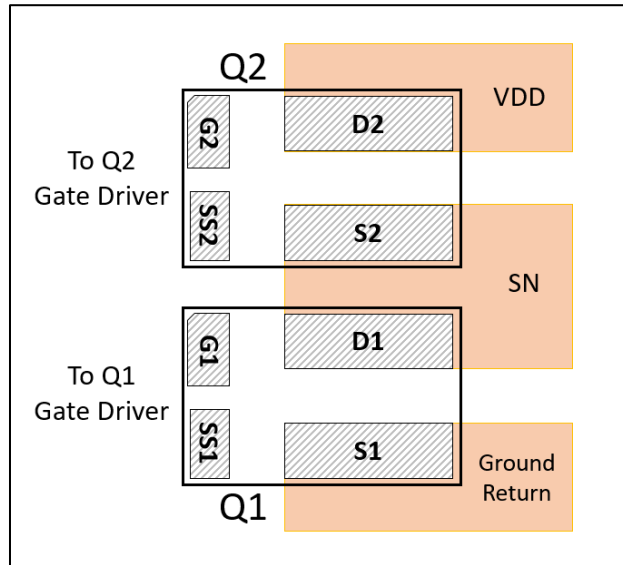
Example PCB layout of two FSMD-B or FSMD-D packaged HEMTs in a half-bridge configuration.
